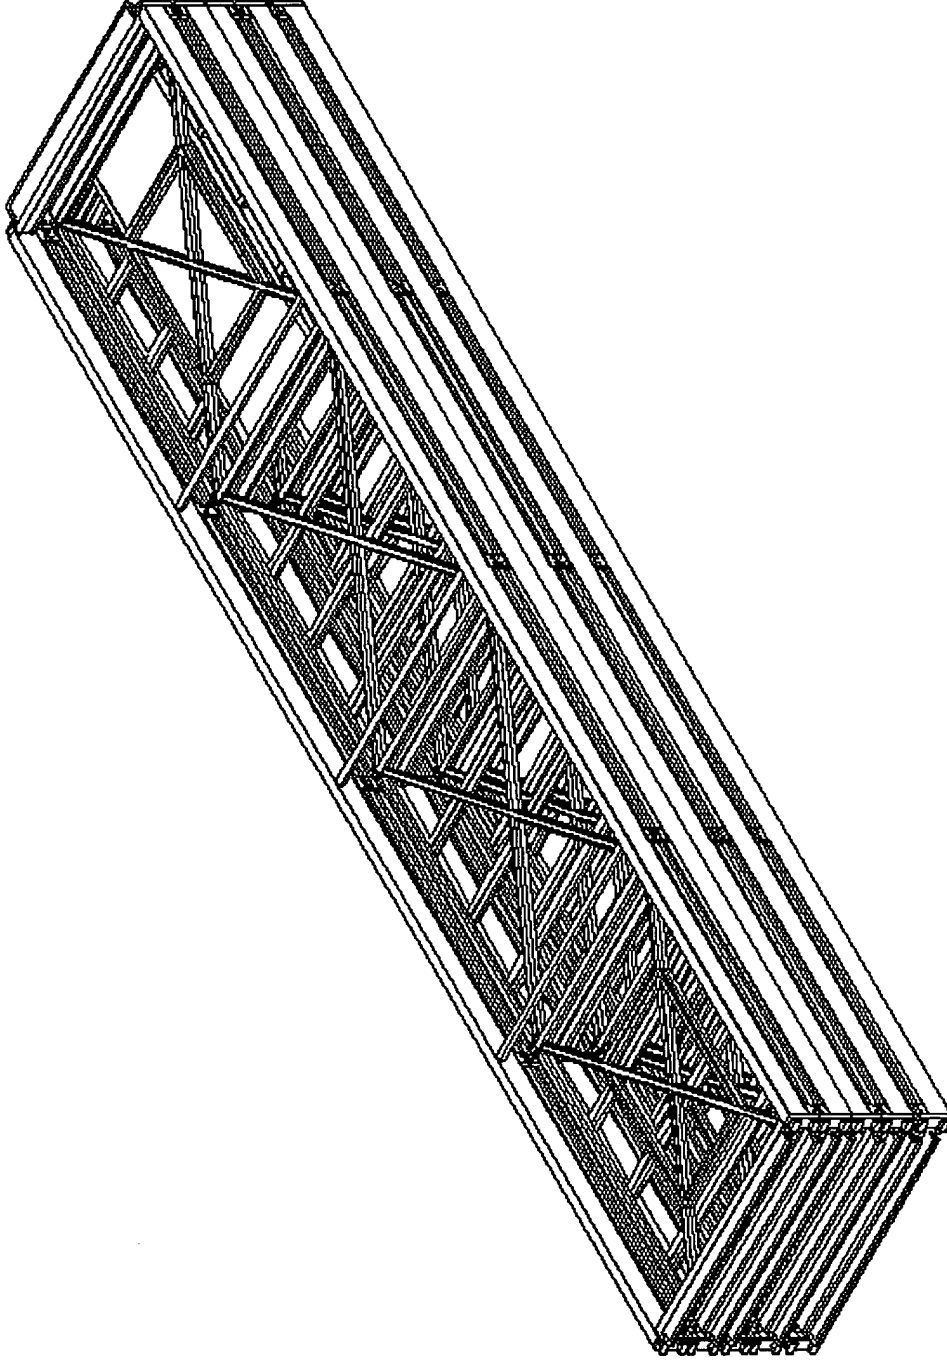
A: Step3 of disassemble and load process: The second “collapsible cargo container frame panel assembly” is stacked on top of previous assembly.
